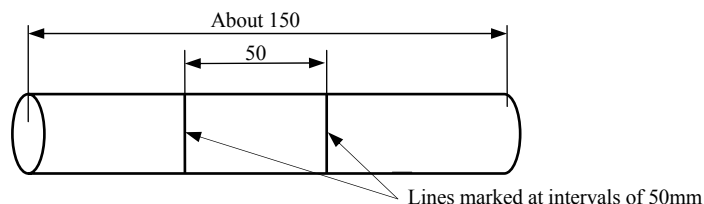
Tubular specimen geometry for tensile test (unit: mm)
